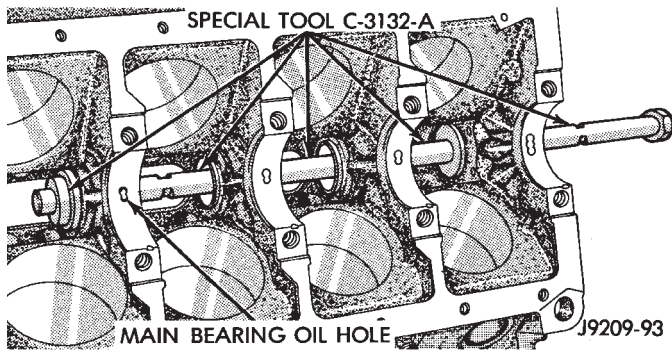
Camshaft Bearings Removal and Installation with Tool C-3132-A
